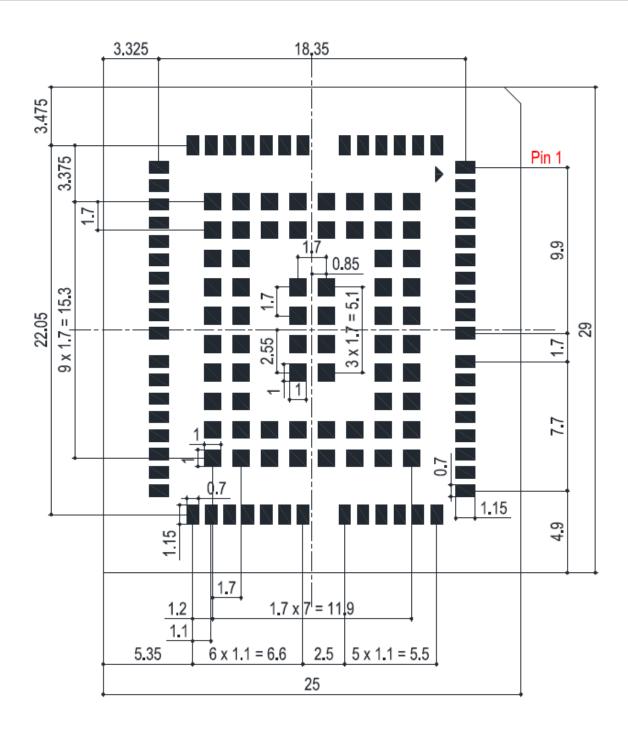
Module Bottom Dimensions (Bottom View, Unit: mm)
